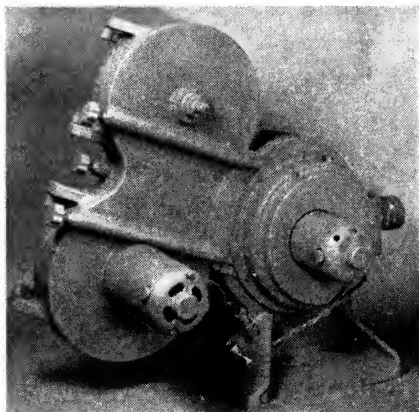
Rear view, showing adjustable torque feed spindle and motor.
